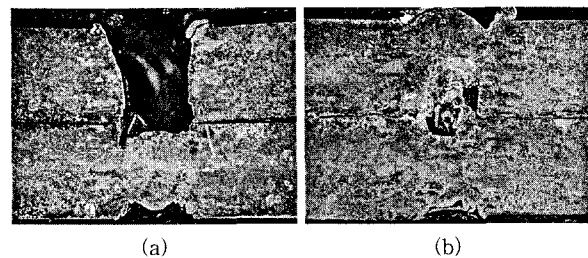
Transverse cross-section of autogenous laser lap joining of zinc-coated steel sheets : (a) Blow-hole, (b) Porosity
